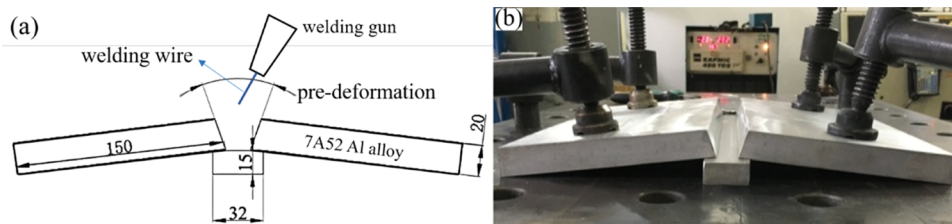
Schematic of welding: (a) assembly schematic and (b) actual assembly drawings.
